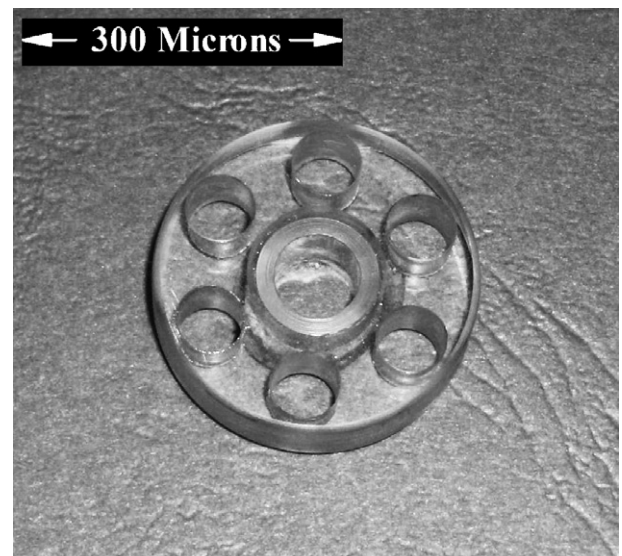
(c). Microscopic view of a multi-holed baffle plate fabricated using the laser ablation micromachining technique.
